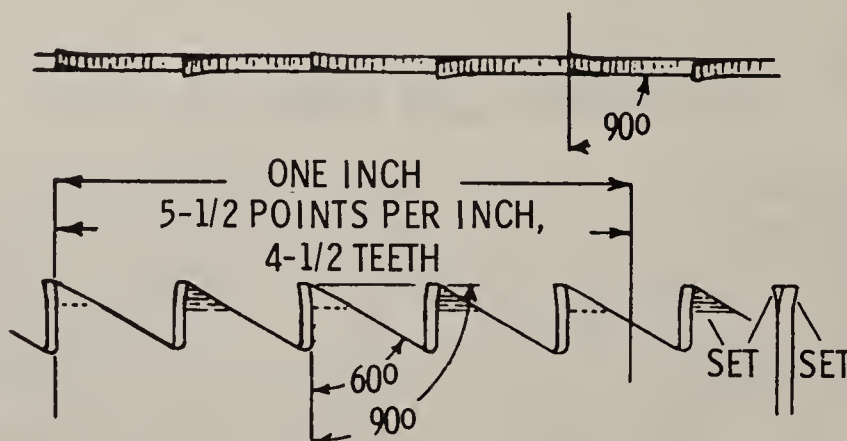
Side view and tooth-edge view of typical rip saw. The rip saw is used for cutting with the grain, and its teeth are shaped like chisels. The cutting action is also very much like that of a chisel in that each tooth chips out a small portion of wood from the kerf or cut. Cutting is done on the forward stroke. The upper half of each tooth is set alternately, one tooth to the left and one to the right to give the necessary clearance. This set, on each side, should be equal to one-third of the thickness of the blade or less.
